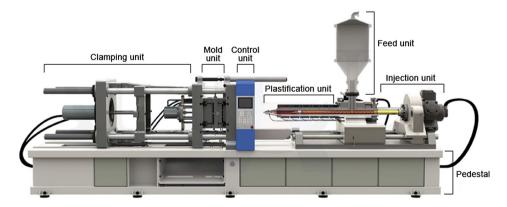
Schematic of an injection molding machine (side view) (Courtesy of Moldex3D)
